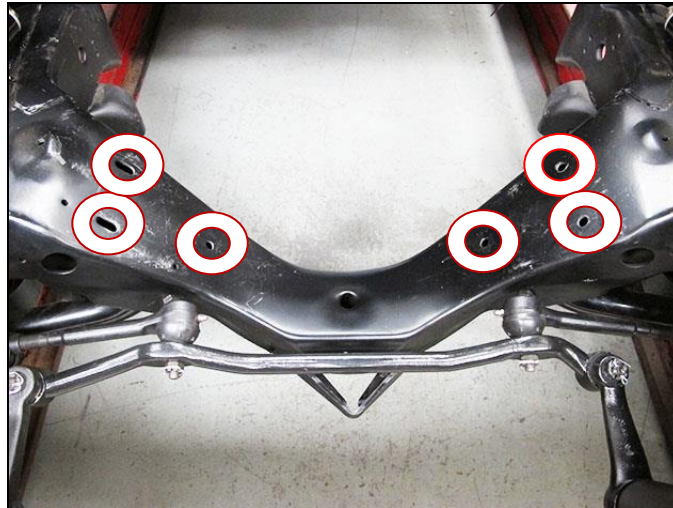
Attach engine mounting brackets using the stock holes in vehicle frame that are circled above.
